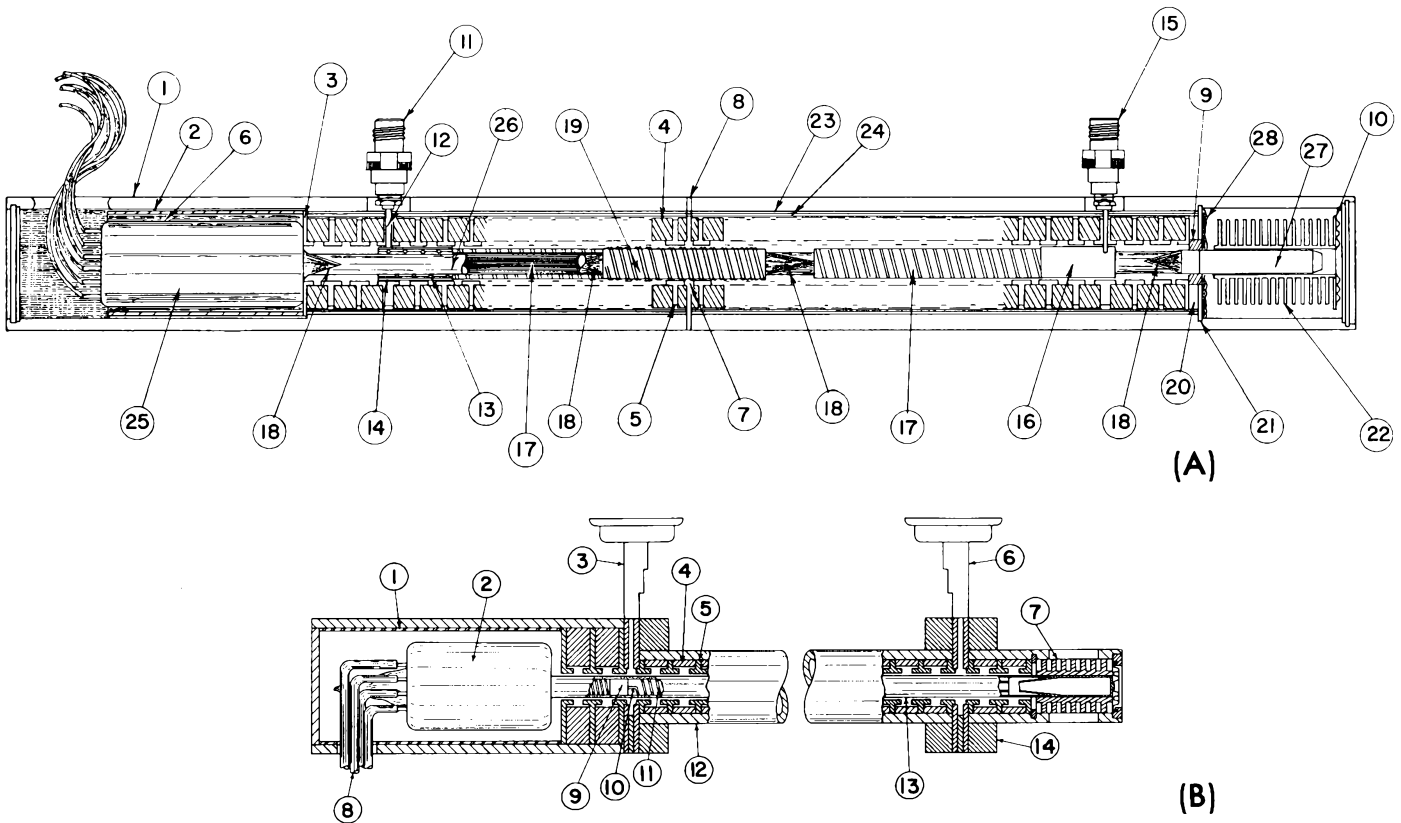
Cross-Sectional Drawings Showing the Arrangement of a PPM Stack in a Helix-Type Traveling-Wave Tube: (A) Tube using helical couplers; (B) Tube using waveguide couplers
